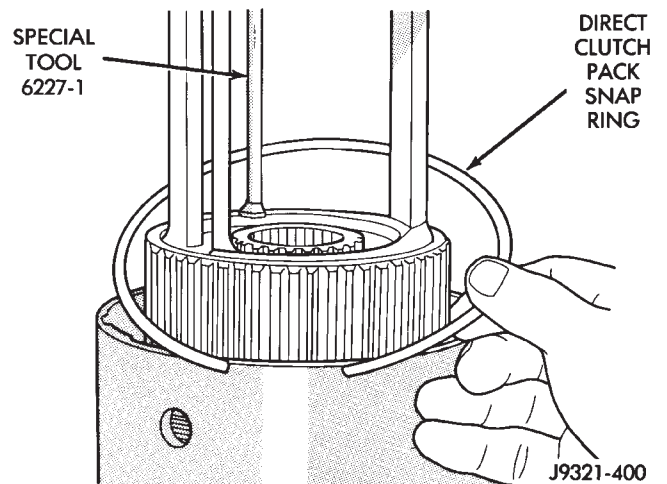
Direct Clutch Pack And Clutch Hub Installation
